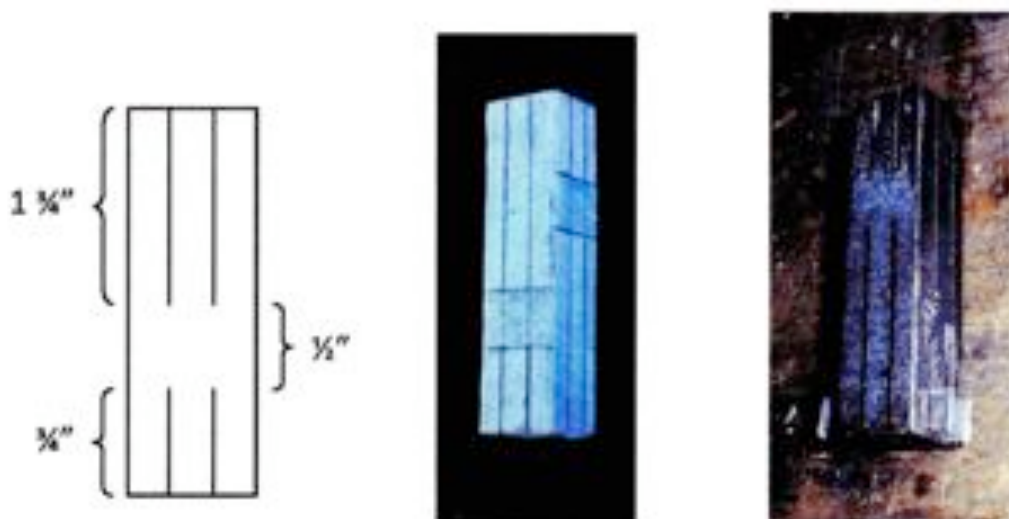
Cut layout (left), blank with marked cuts (center), cut blank with spacers (right)
